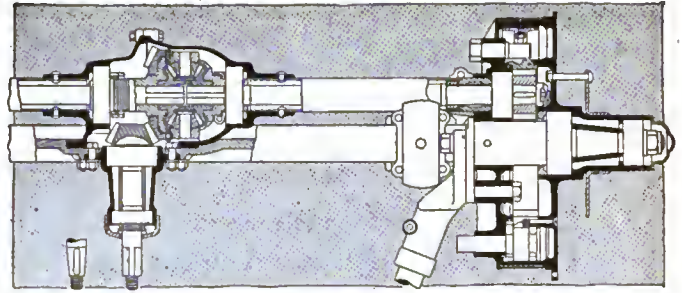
The Torbensen type S rear axle for trucks which is of the internal gear type. The driving member is back of the dead-load member
